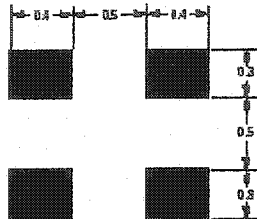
PCB Pad Layout, MiniPak (dimensions in mm).
